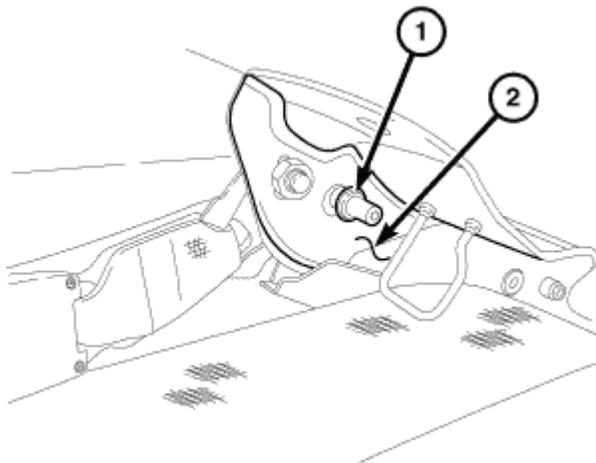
Removing/Installing Seat Bolt From Floor Bracket
